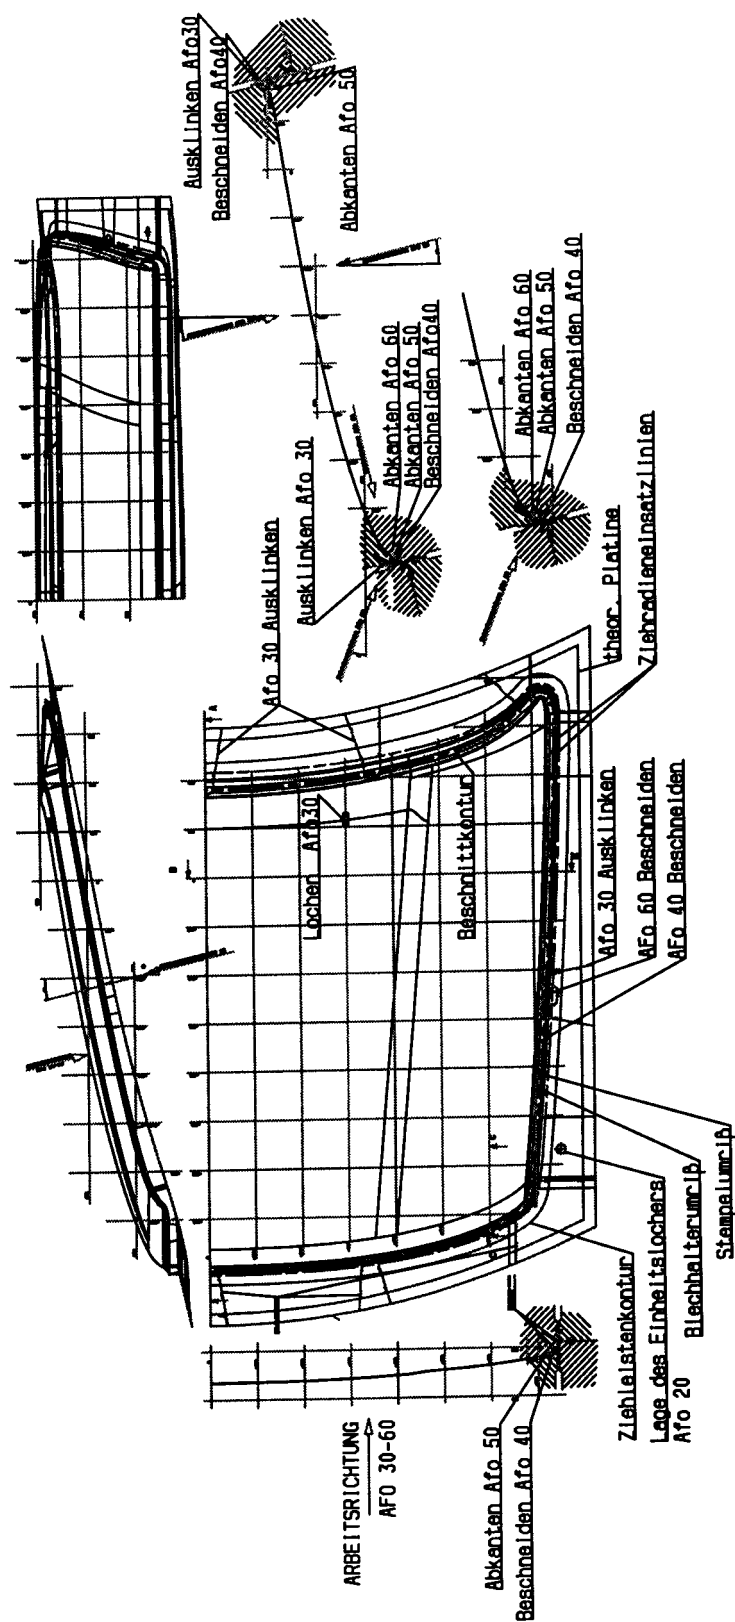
Technical drawing representing the methods plan of the outside panel
